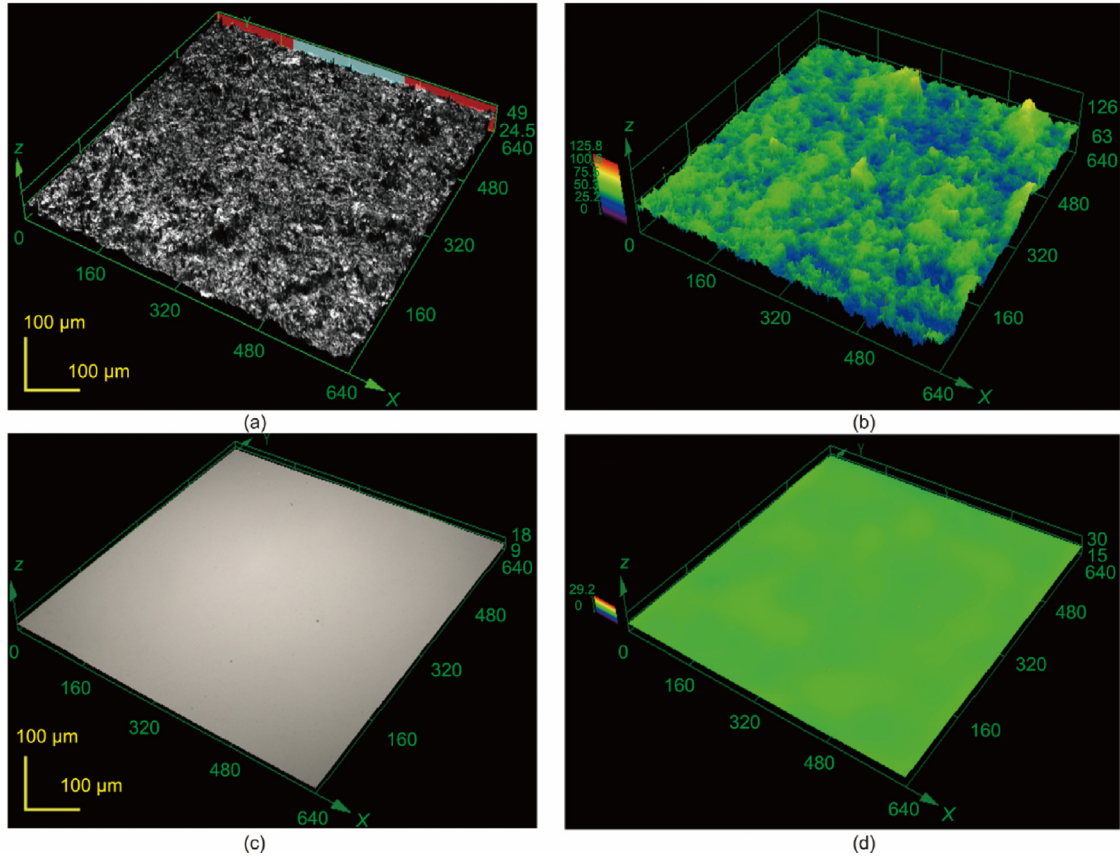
Morphologies of the inner sidewalls of the middle glass holes using a laser scanning confocal microscope. (a) Morphology before molding. (b) Three-dimensional topography before molding. (c) Morphology after molding. (d) Three-dimensional topography after molding.
